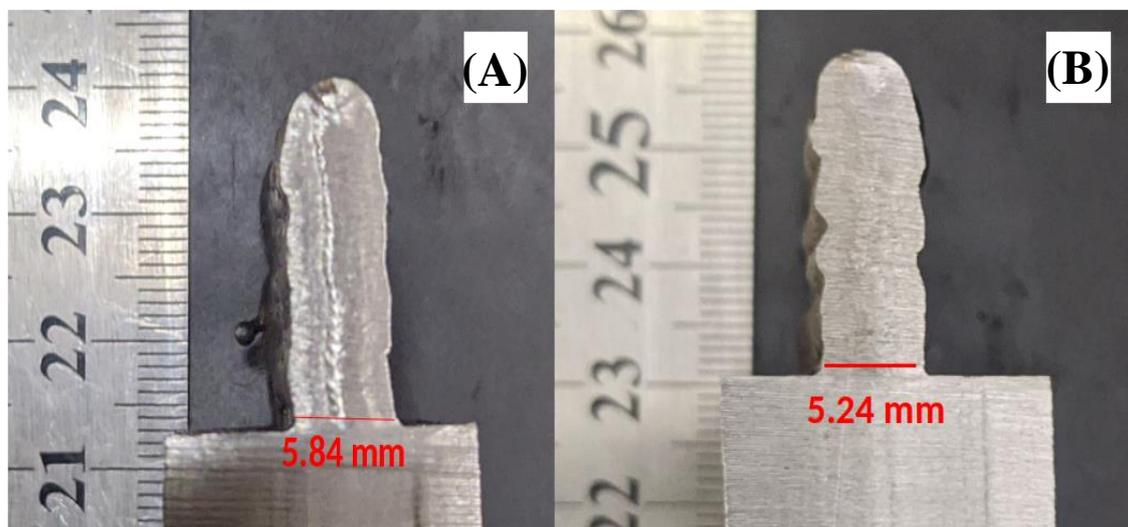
(A) Dimensions of the central cross-section of preform 1; (B) Dimensions of the central cross-section of preform 2.
